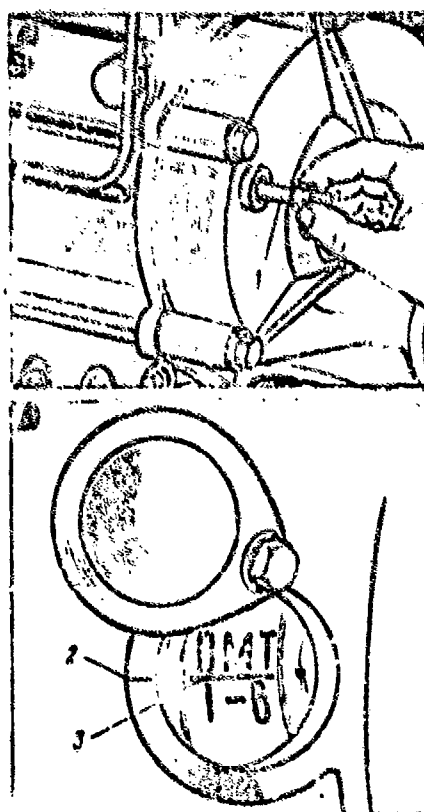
Method of setting piston of first cylinder at top dead center:
